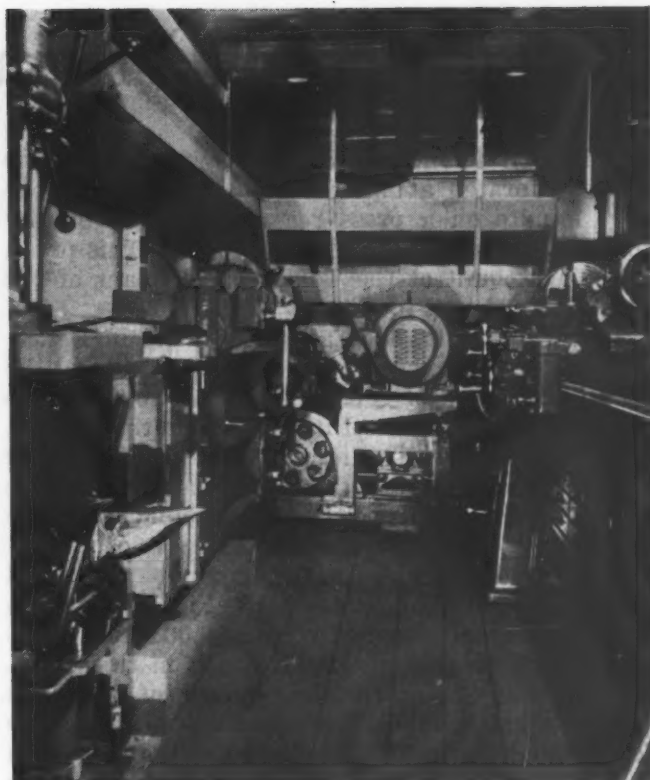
View Showing How Equipment is Arranged to Provide Adequate Space for Several Workmen
